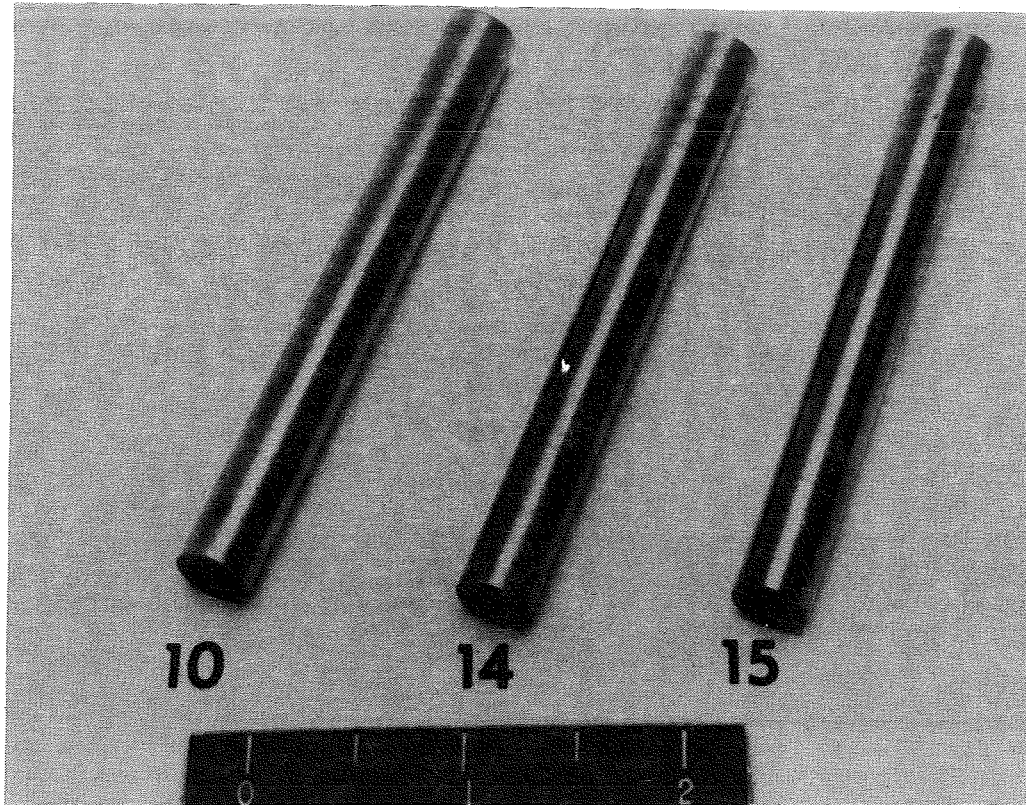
RCF TEST SPECIMENS - AFTER TESTING. NOTE WEAR TRACKS AND SPALLS.
